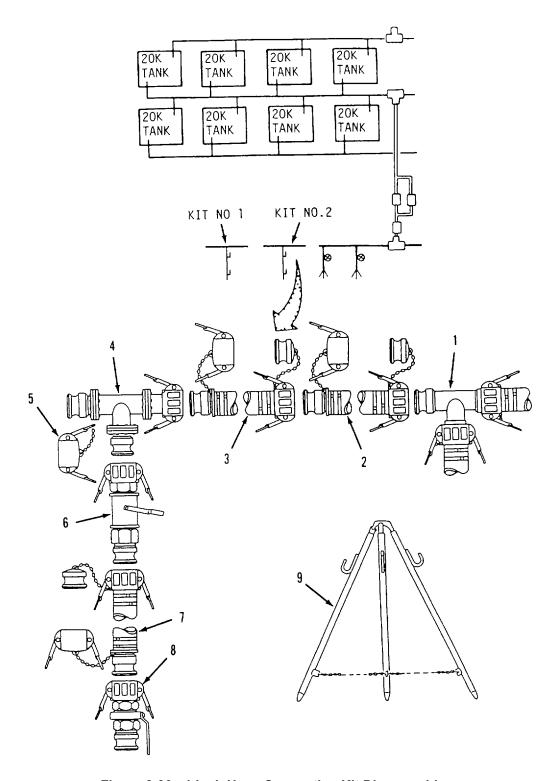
4-Inch Hose Connection Kit Disassembly.
